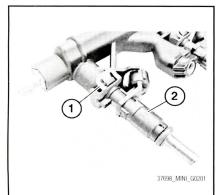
Lever out retainers (1) and remove fuel injectors (2)
